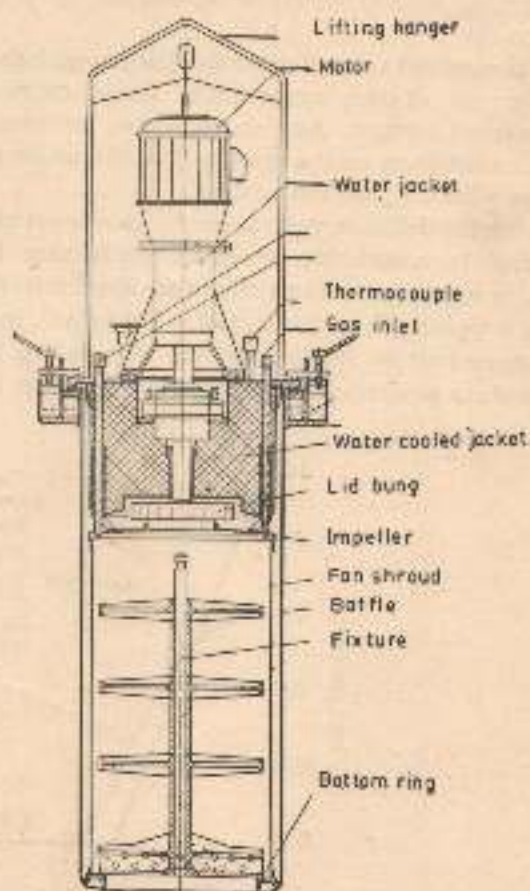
(b) Retort assembly for gas-carburizing furnace (Courtesy: Fabricast Bombay, India).
